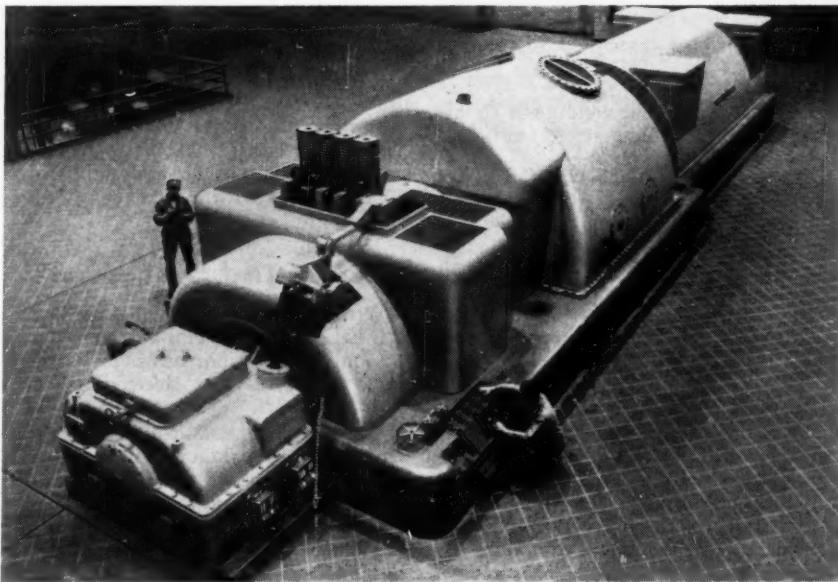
Large steam-turbine-driven electric generator, demonstrating fabrication of large power-plant weldments
